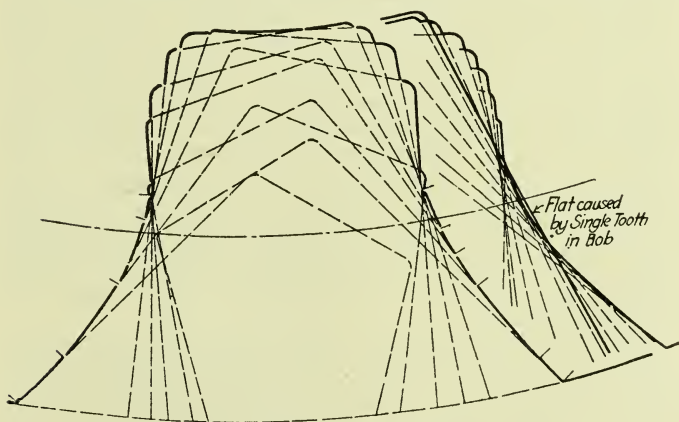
A SINGLE HIGH TOOTH IN A HOB WILL PRODUCE A WIDER FLAT IN THE GEAR THAN IF ALL THE TEETH ARE OF UNIFORM HEIGHT
